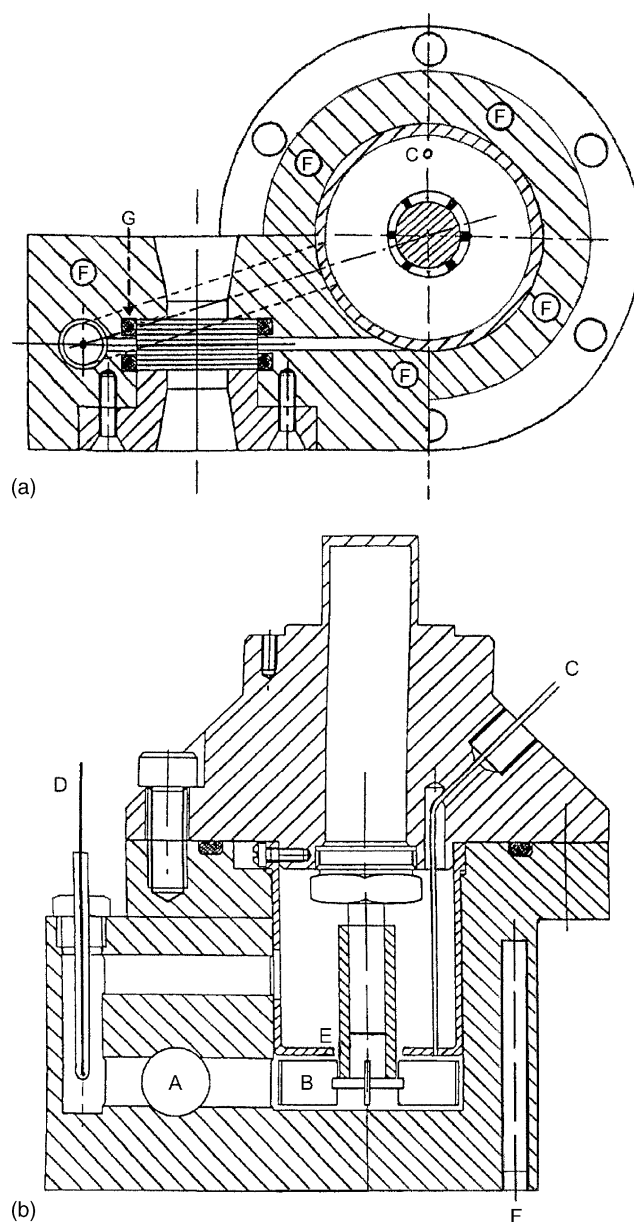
Side- and top-view of the in situ infrared autoclave: (A) IR windows; (B) turbine rotor; (C) reagent addition; (D) thermocouple; (E) opening between upper and lower chamber; (F) electrical heaters; (G) Kalrez® O-rings.
